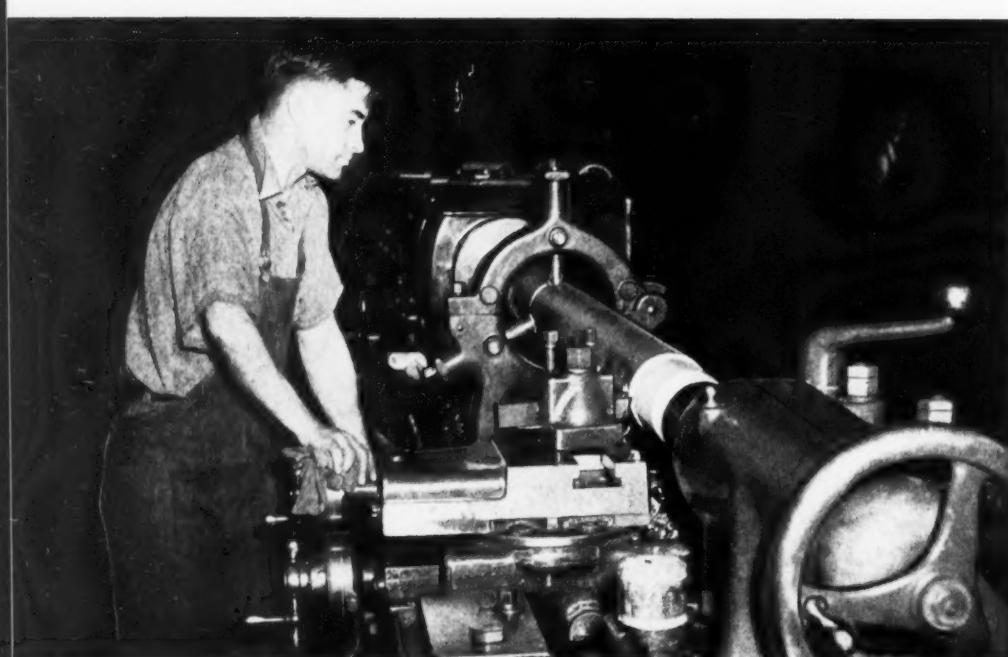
Typical Turning Operation on One of the Modern Lathes Recently Installed in the Machine Shop of the Shipyard
